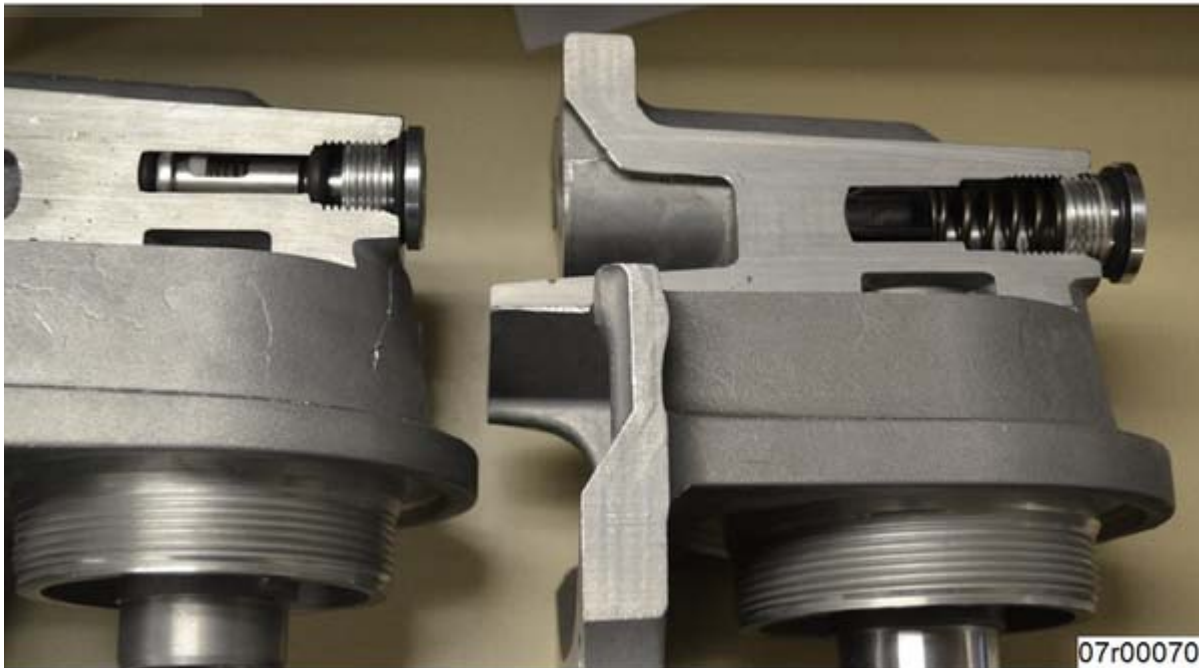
, Left: New Single Piece Bypass Valve Installed. Right: Obsolete Spring and Bypass Valve Installed.
